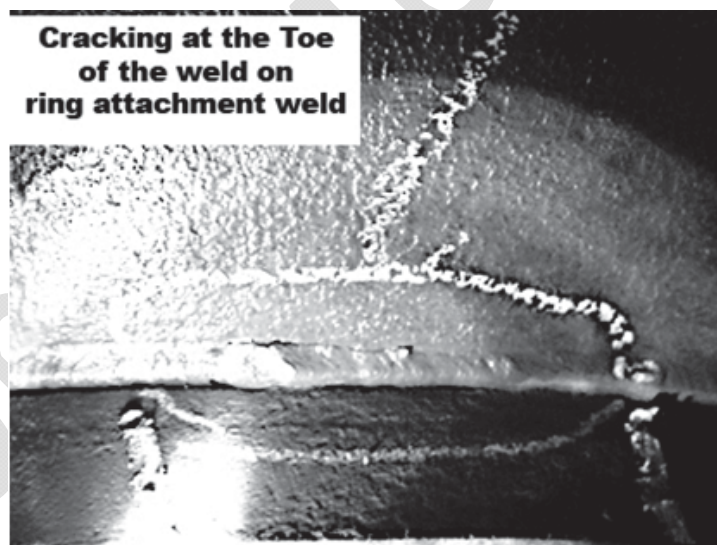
Cracking at Tray Support Ring Weld
